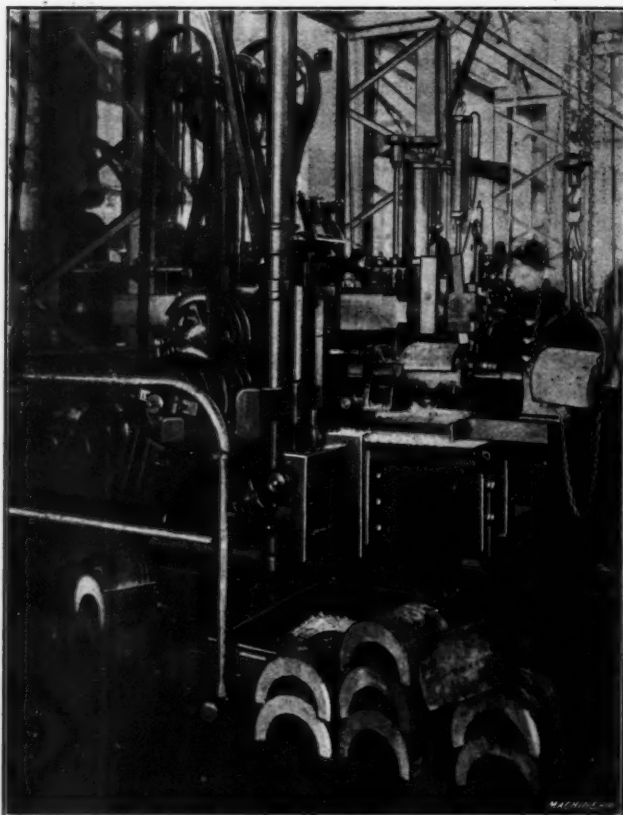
Morton Draw-cut Shaper used on Crown Brass Fitting
